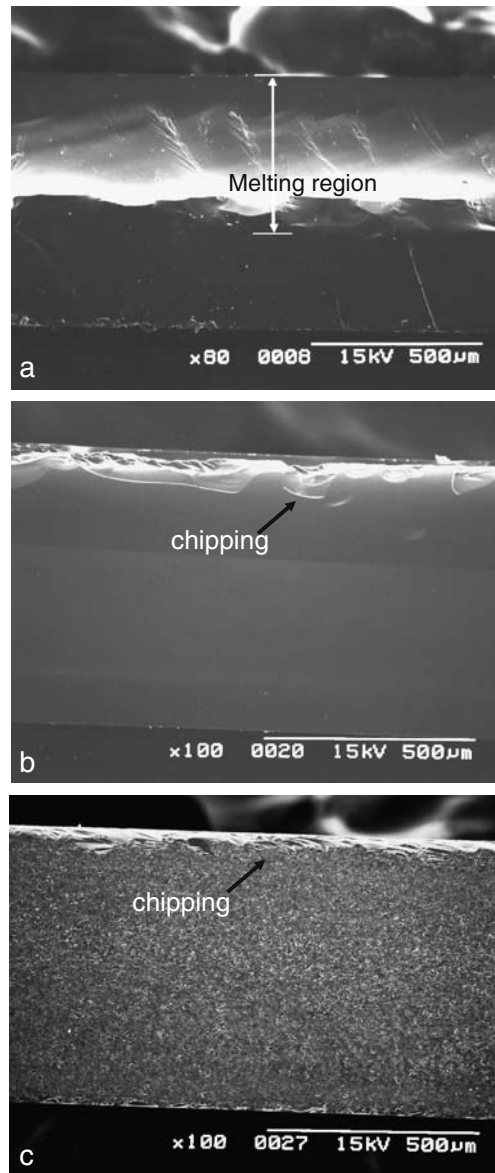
SEM photographs of the separation surfaces of the LCD glass using the method of (a) laser cutting without bending, (b) diamond scribing and breaking, and (c) diamond through cutting
